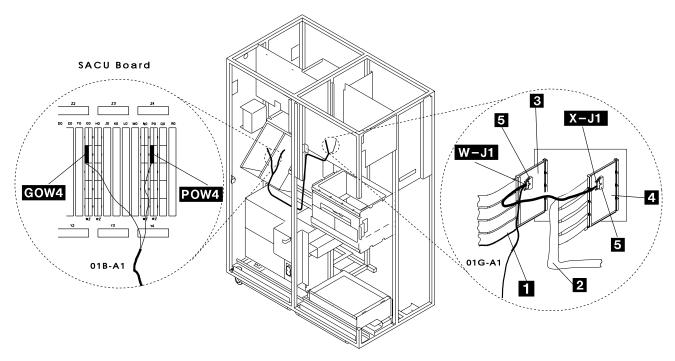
Cable 2 (PN 43G3181) Routing on a TSST Board
